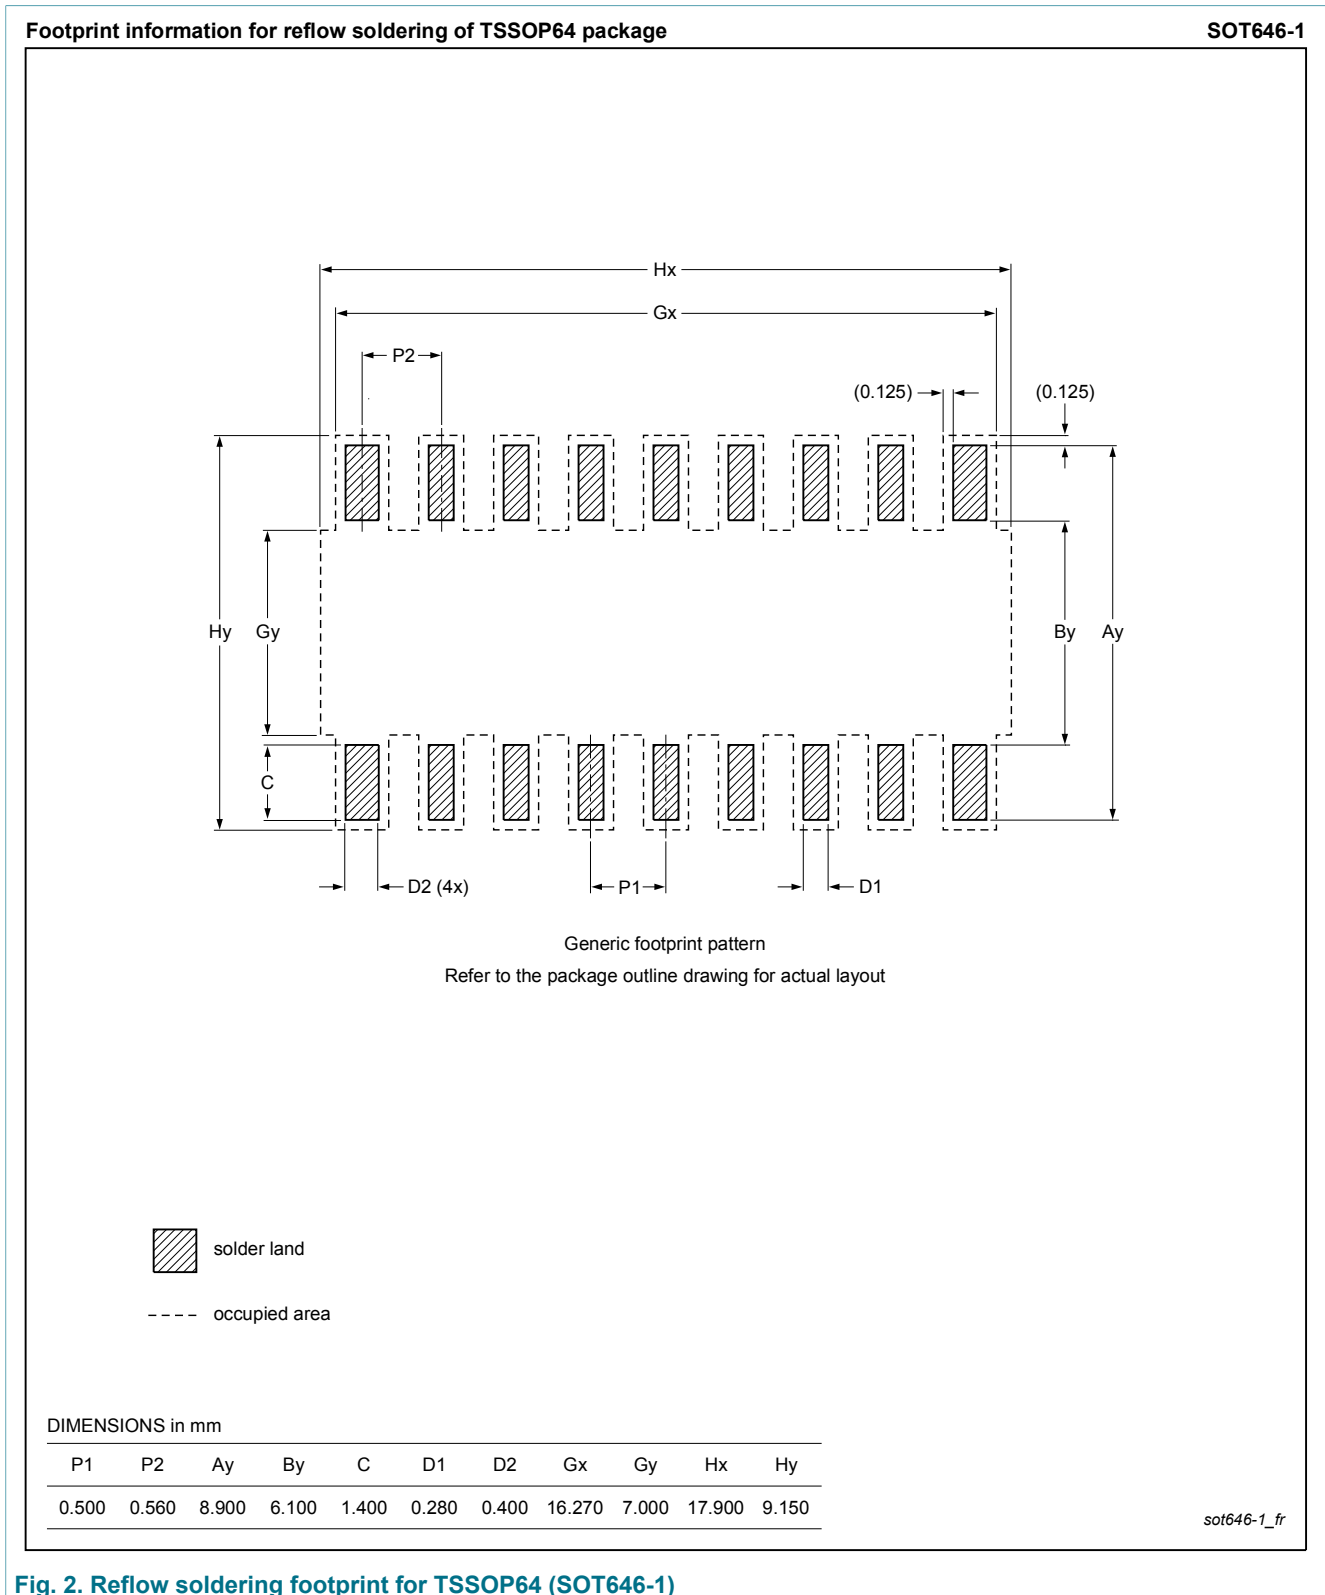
Reflow soldering footprint for TSSOP64 (SOT646-1)
